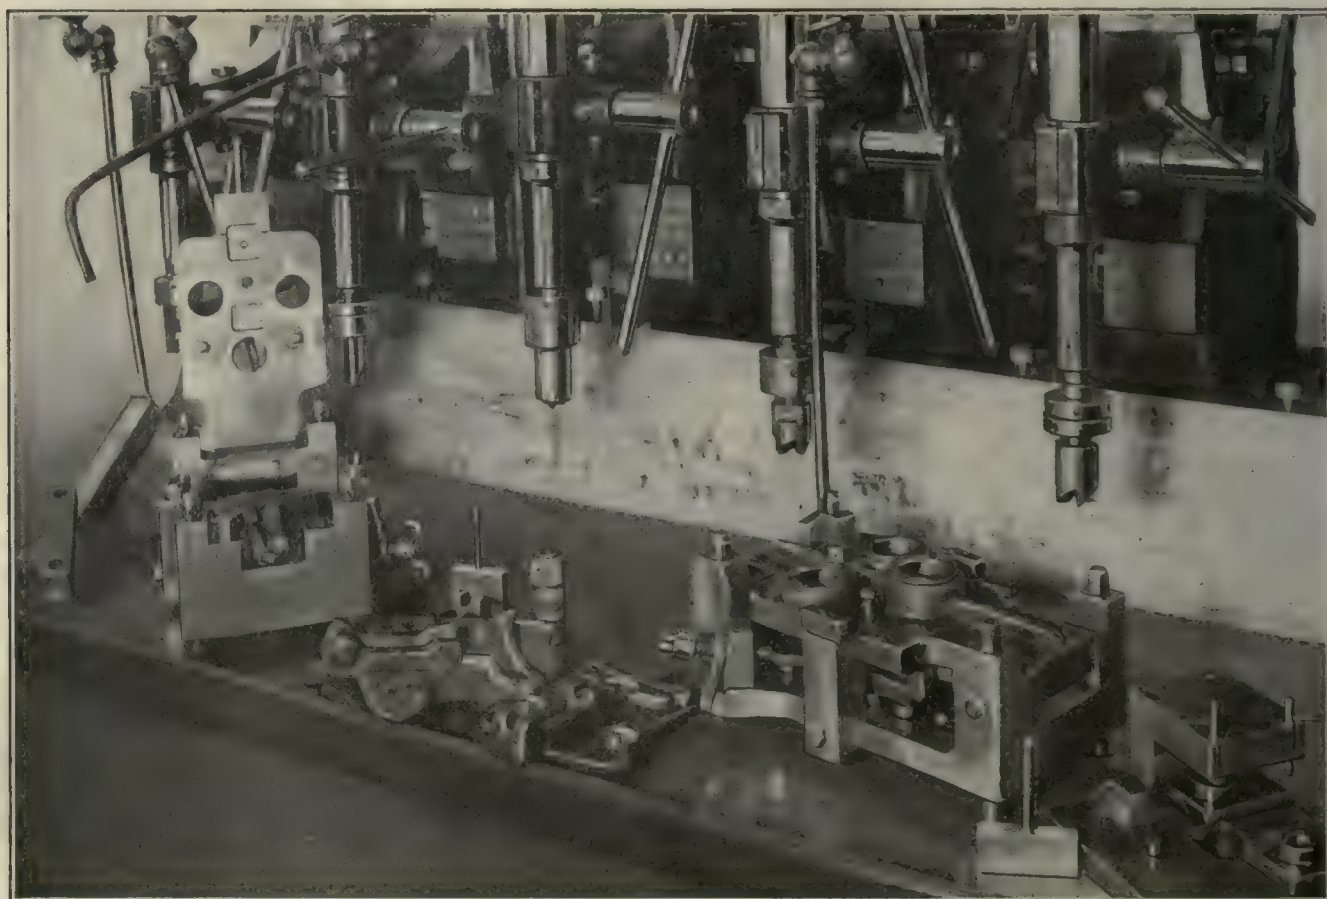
JIGS FOR HOLLOW MILLING THE LOCATING HUBS ON THE FEED COVER
